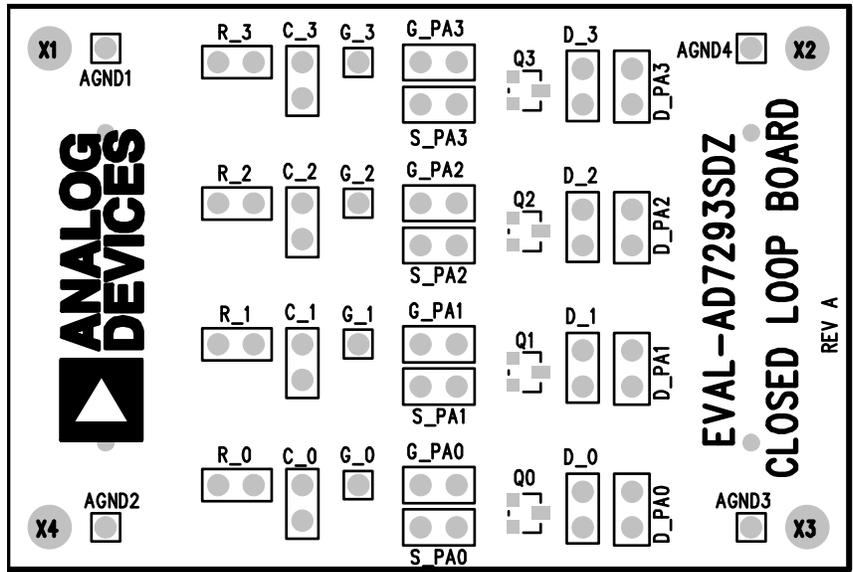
EVAL-AD7293SDZ Daughter Board Layout, Silkscreen View
